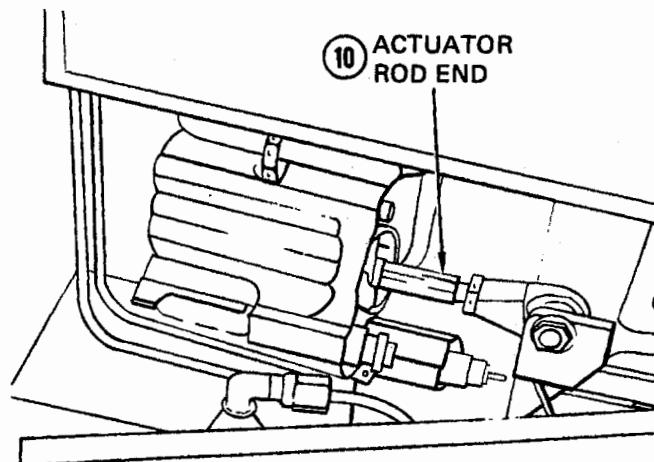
Steering Actuator Rod to Universal Rig Tool
